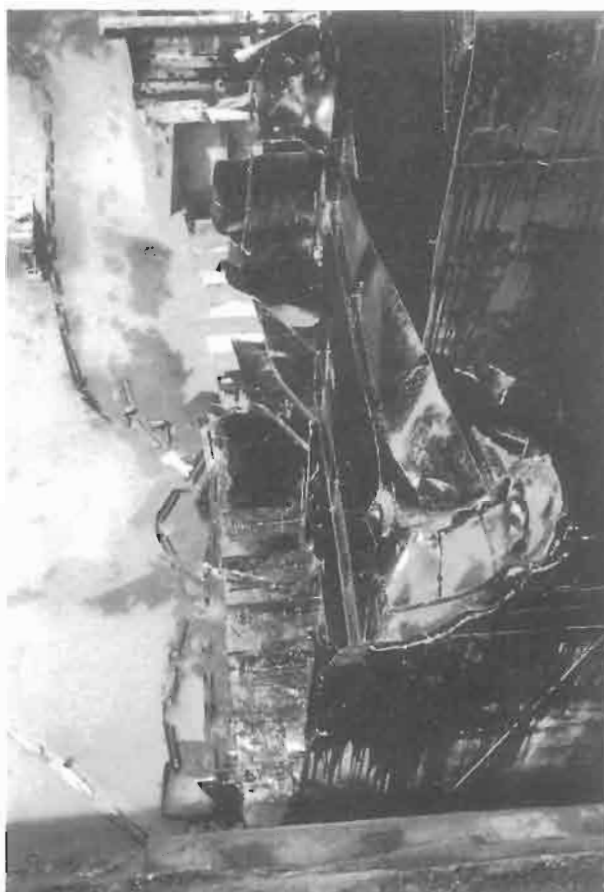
Port hull plates and longitudinal bulkhead fractures: deformation to the web frame on the port side is also visible.
